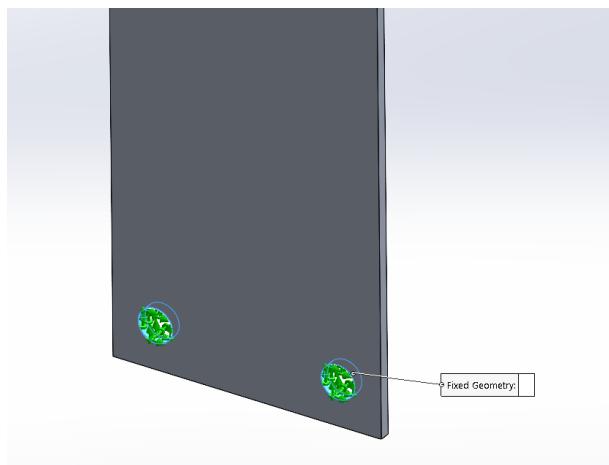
Side Reinforcement Plate; FEA; Fixed Geometry
